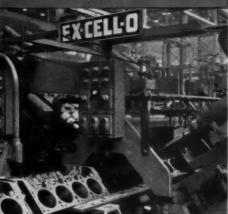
Special cold-assembling press—companion equipment for bonding machine shown in Fig. 1.
